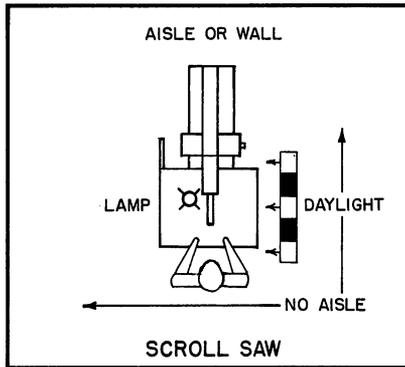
(Courtesy Rockwell Manufacturing Co.)
